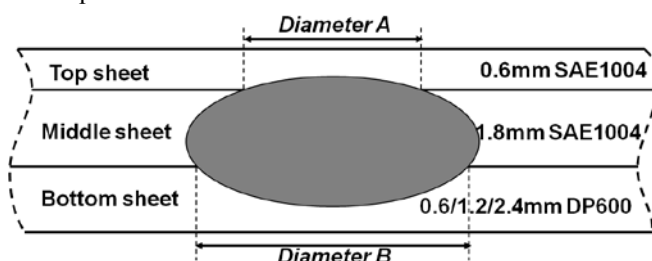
Weld nugget configuration and dimensions for resistance spot welding of multi-stackup steel sheets.
